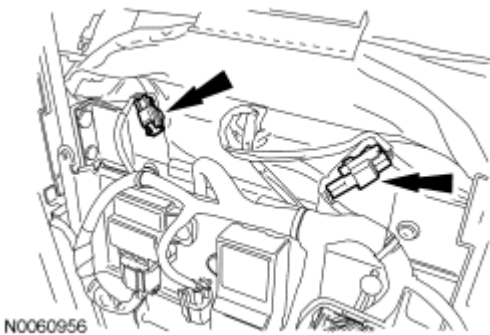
Locating Heated Seat Electrical Connector & Pin-Type Retainers
